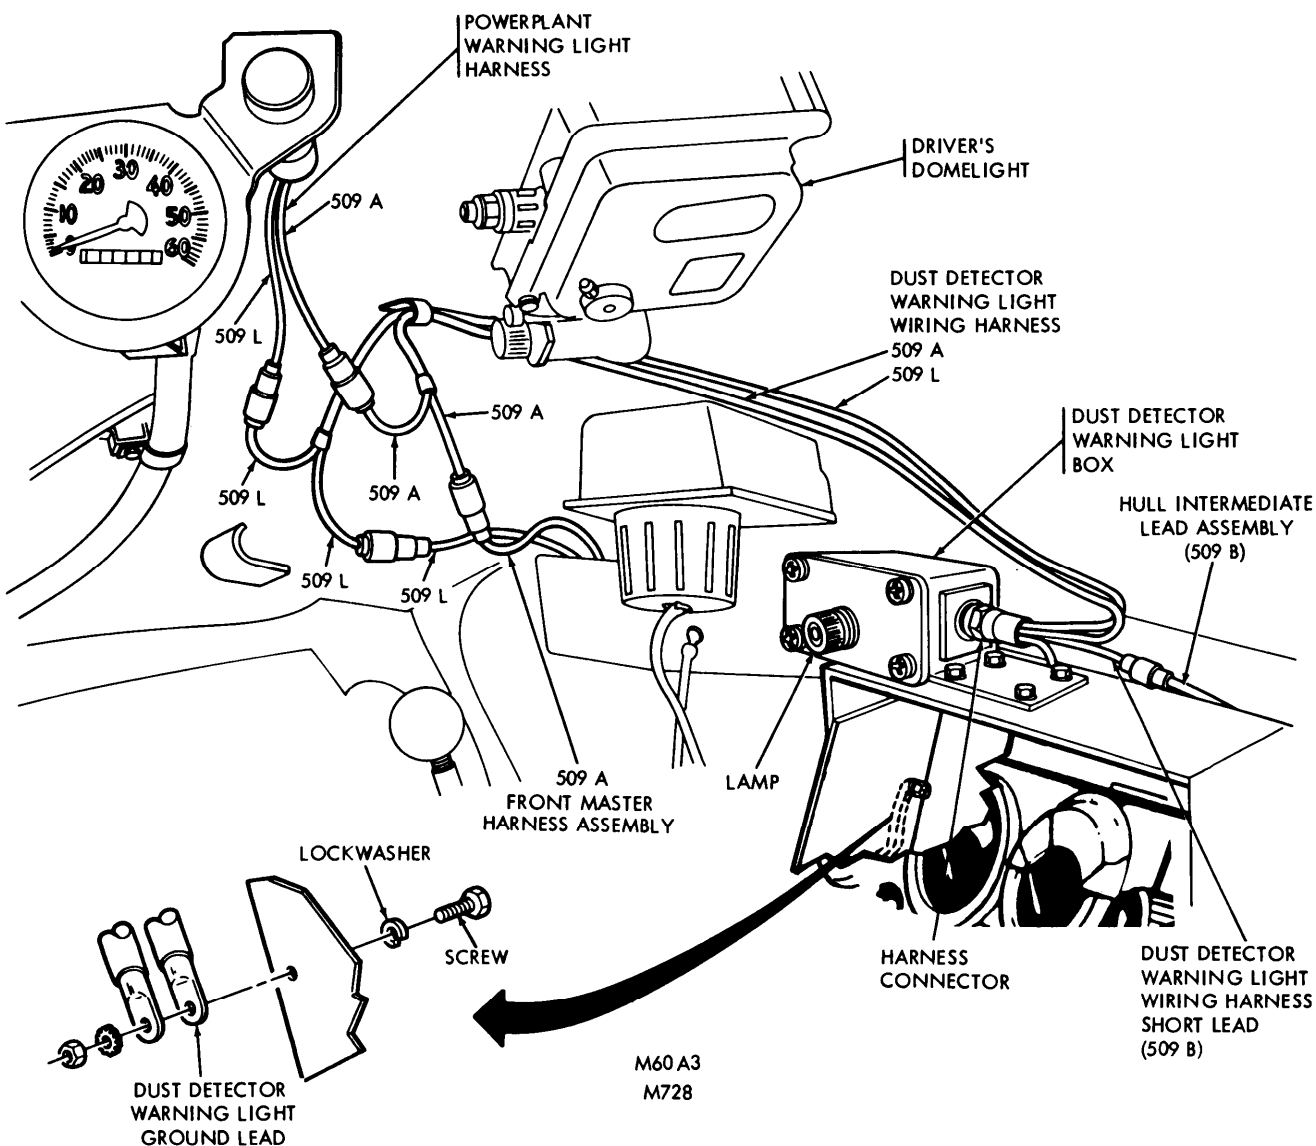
Dust detector warning light wiring harness assembly replacement (Sheet 1 of 2).
